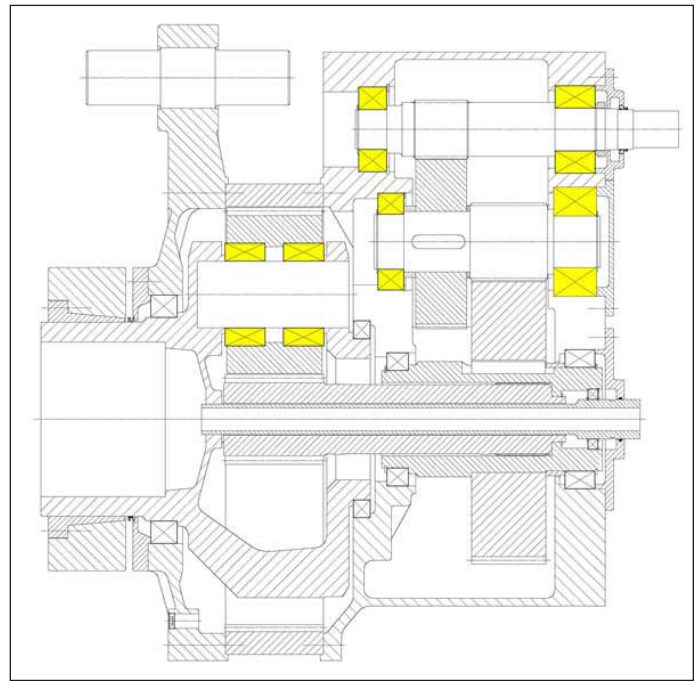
Standard multi-megawatt (MMW) wind gearbox (for 3-point suspension) having a low-speed planet stage and two spur wheel sections (high-speed intermediate shaft and high-speed shaft) with highlighted bearing locations that can be affected by premature bearing failures.
